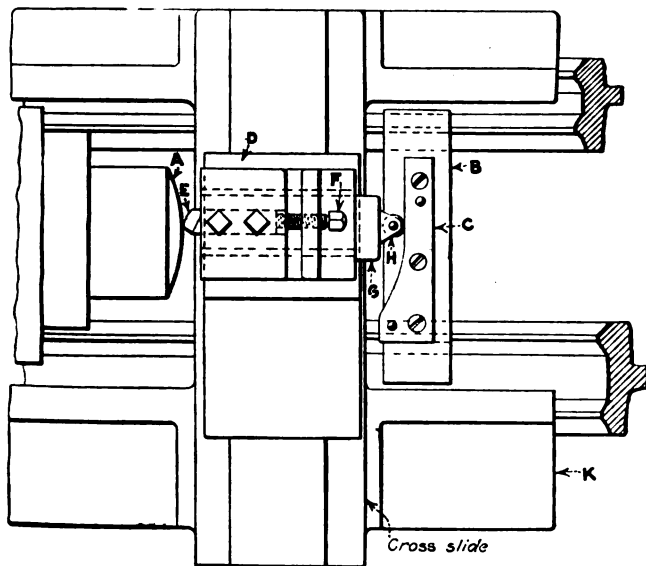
DEVICE FOR ROUNDING THE END OF A CASTING
